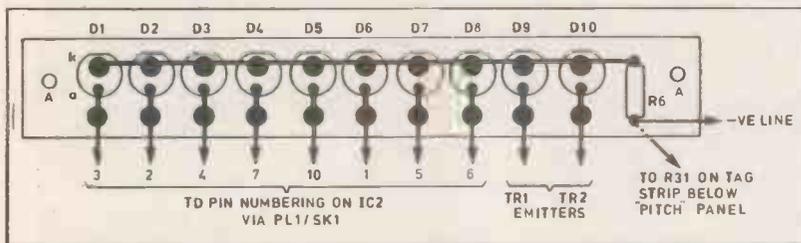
Using a small board to wire the wicket l.e.d.s. This board could be made from stripboard.
